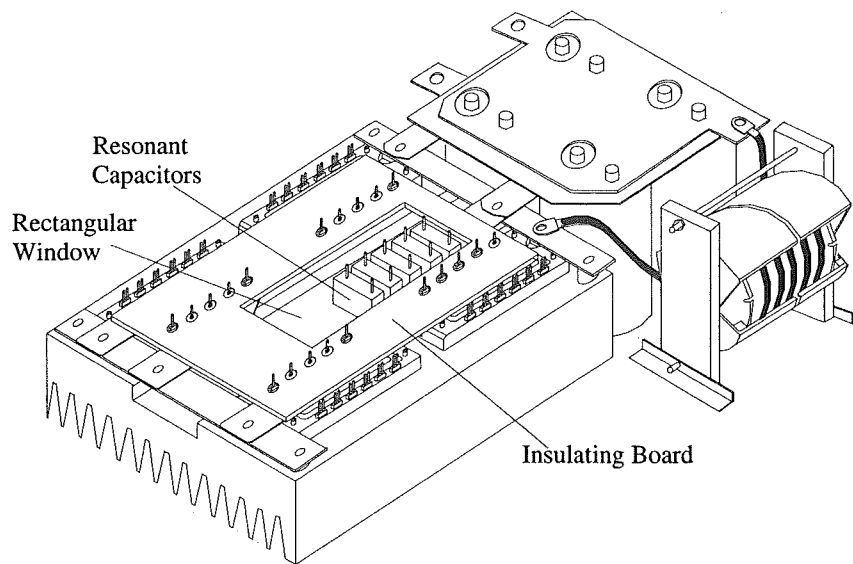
Insulating board between the bottom layer and the laminated bus.
